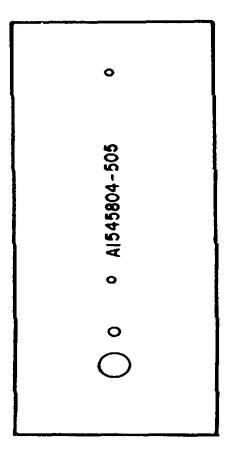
Alarm monitor Supply Test Fixture, Top Chassis Marking.
